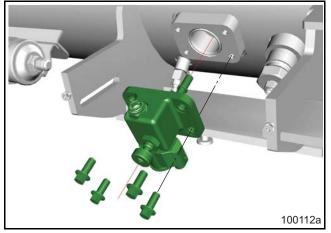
Tank Supply Circuit Assembly (Typical, Mounting Position Varies)
